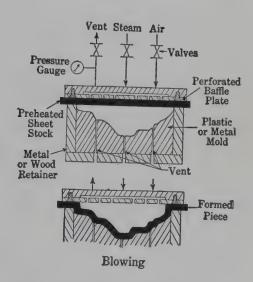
Typical fabrication method used for the shaping of "Vinylite" sheet stock. (Courtesy of Carbide & Carbon Chemicals Corporation.)
